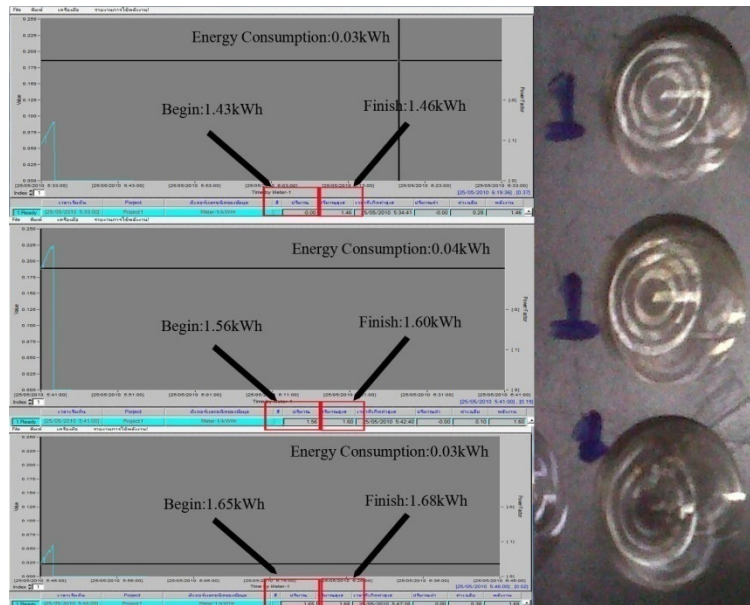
workpiece(1) under the conditions: 2500rpm:1000mm/min:1mm
